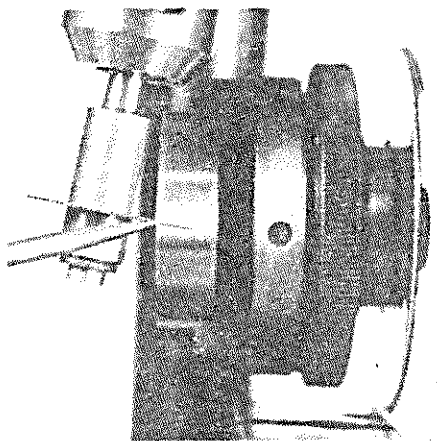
Centring the slitting saw for forming the crown wheel teeth
